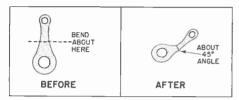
Method of bending a soldering lug with long-nose pliers. Bending should be done before the lug is bolted to the chassis; once a flat lug is bolted to a chassis, it is difficult to pry the lug upward to a convenient soldering position.
